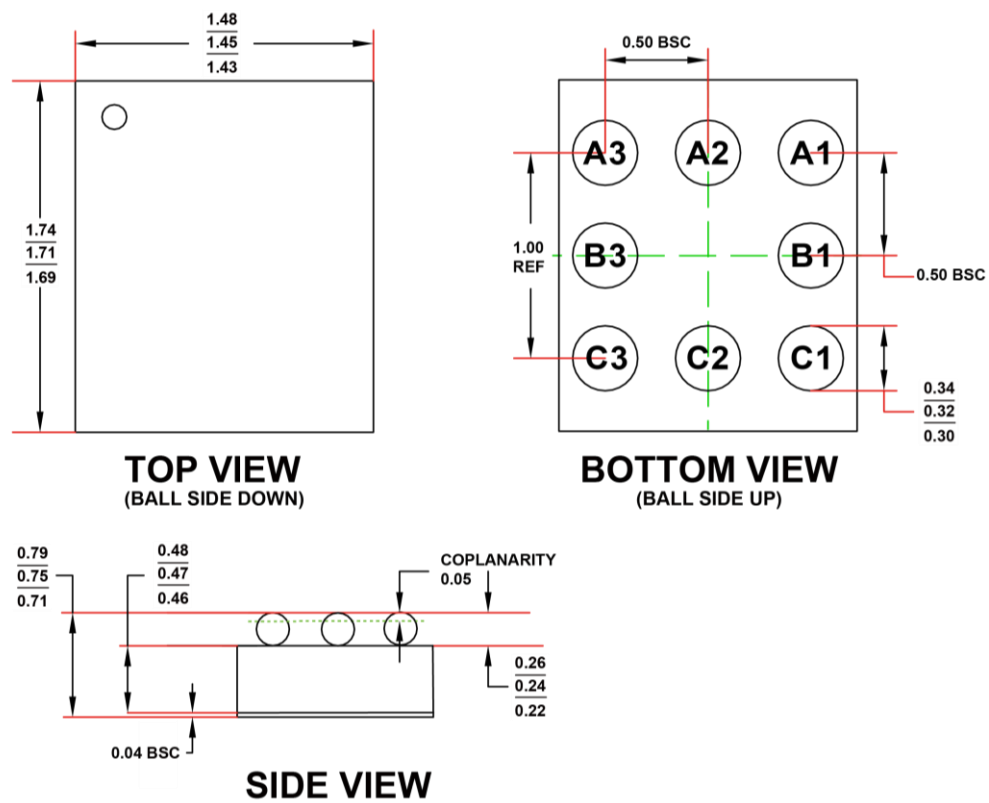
8-Ball WLCSP Package Dimensions shown in millimeters
